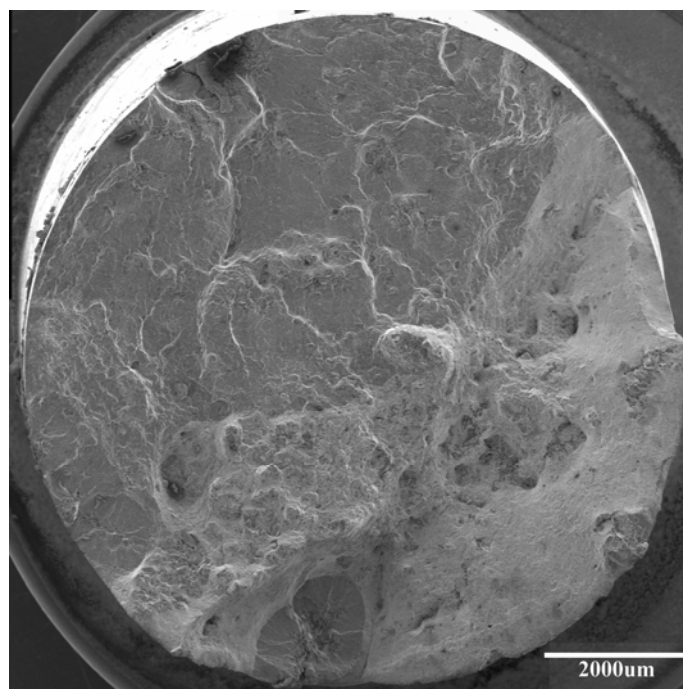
Macroscopic View of a Strain Control Truncated Cone Specimen Fracture Surface, $\epsilon_a = 0.004$ (Specimen A4)
